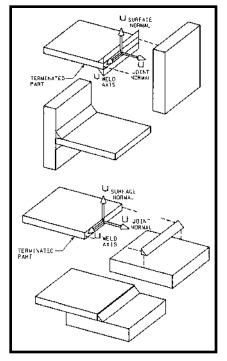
Weld joint coordinate system of the terminated part.
